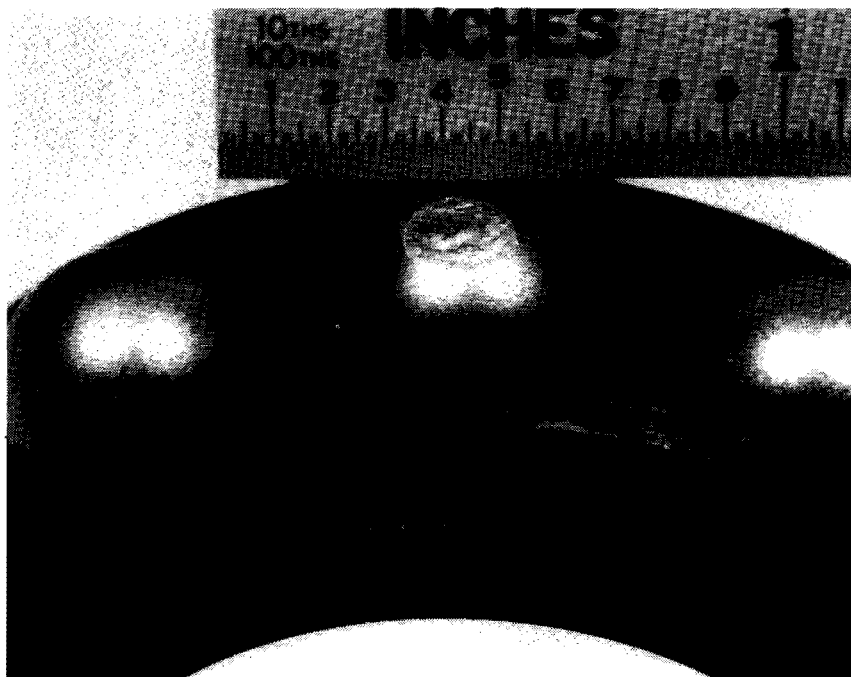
90-Degree Gearbox -456 Bearing Ball Fault C/D,
